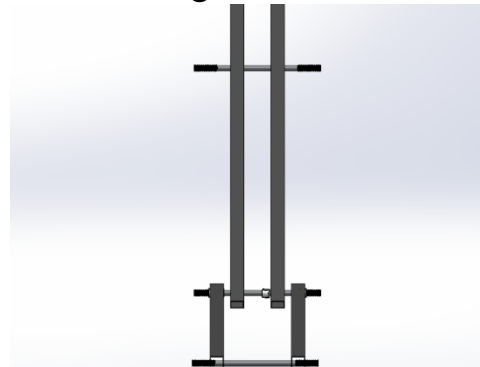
shows a front view of the base of the arm joined with the first link of the arm through a ball screw and some bearings
